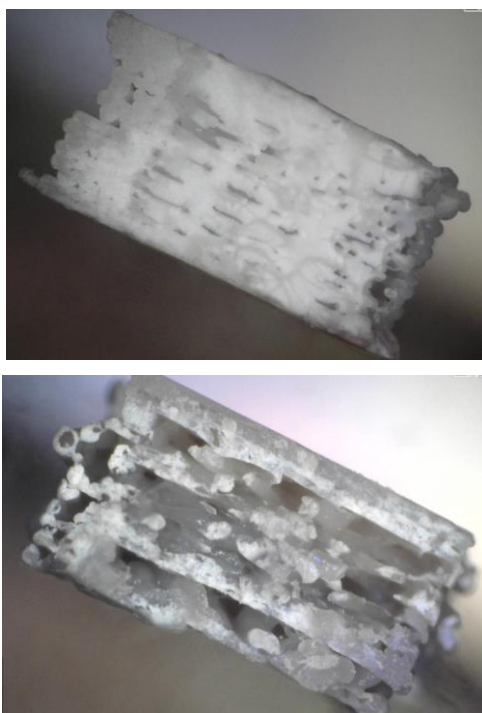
Fracture on printed specimens: commercial PETG (top) and rPETG-rPLA (bottom)
